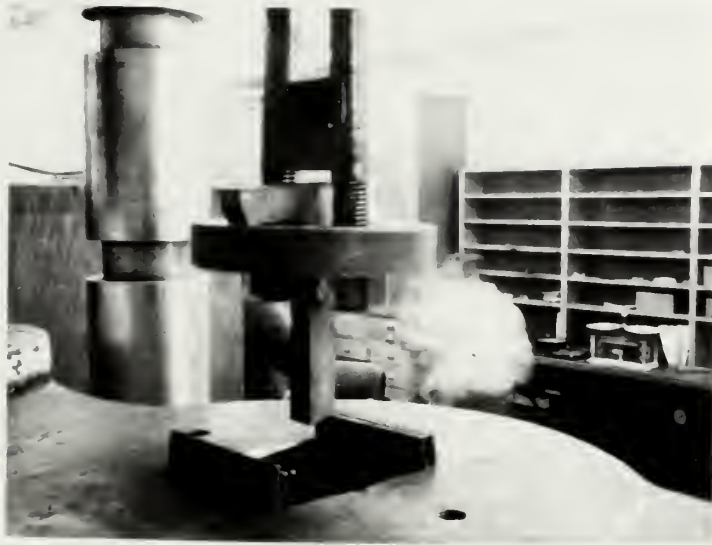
Close up of improved tee-tensile testing assembly showing holding disc. 3/4" HY-80 tee joint is shown ready for testing.
